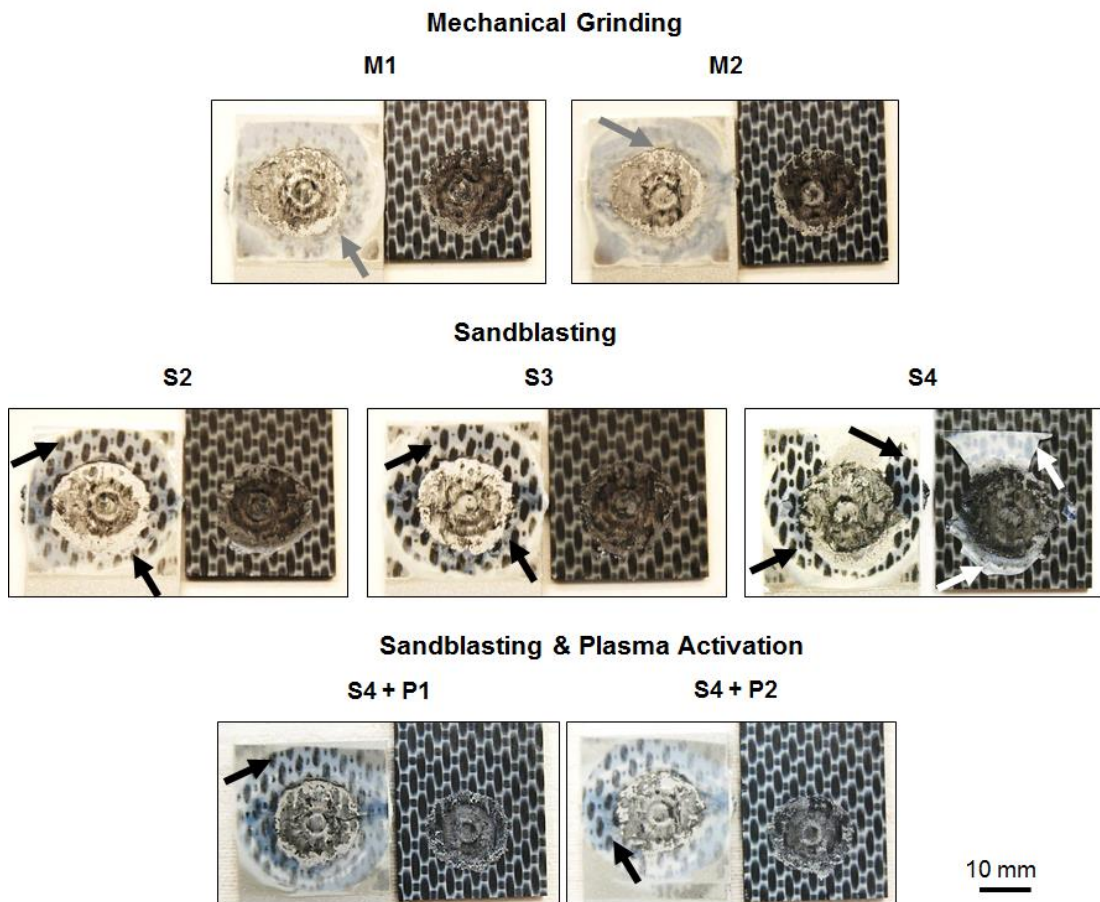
Examples of fracture surface of FSp joints from Figure 5.15 produced with different composite surface treatments.
